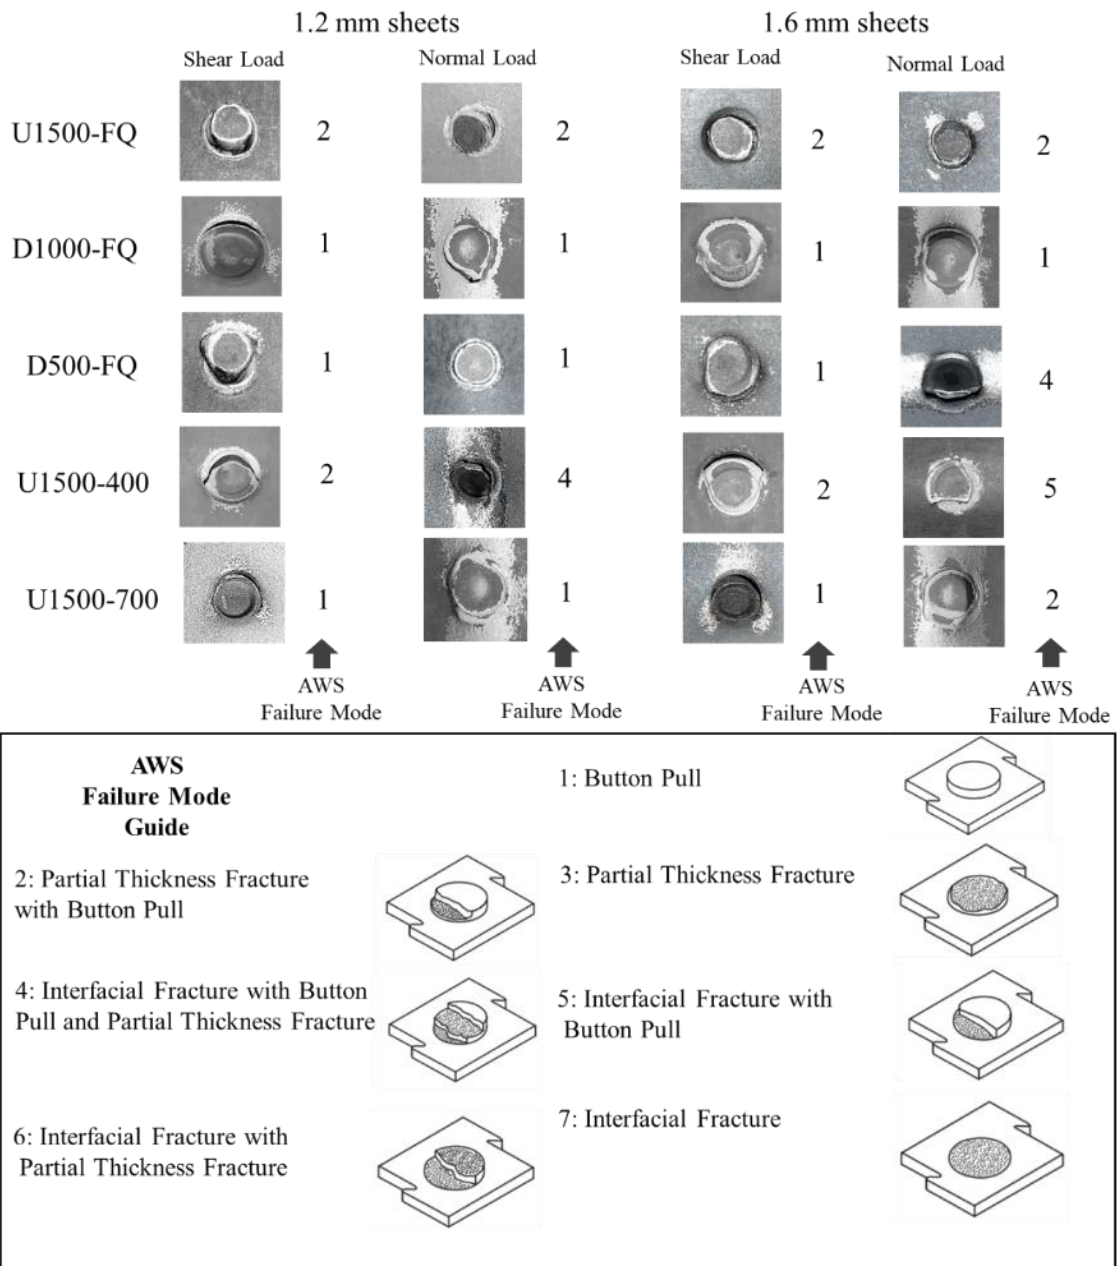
Identified spot weld failure modes for different spot welds, thicknesses and loading conditions based on AWS D8.1 specifications [23]
